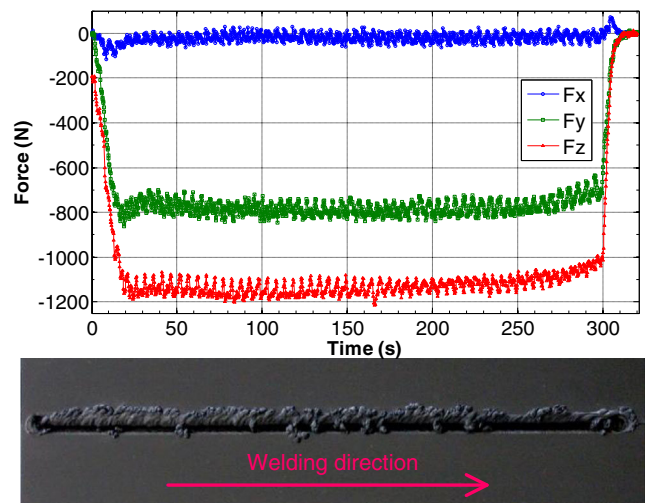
Resulting weld 2: welded seam and measured loads during robotic FSW process using motion
